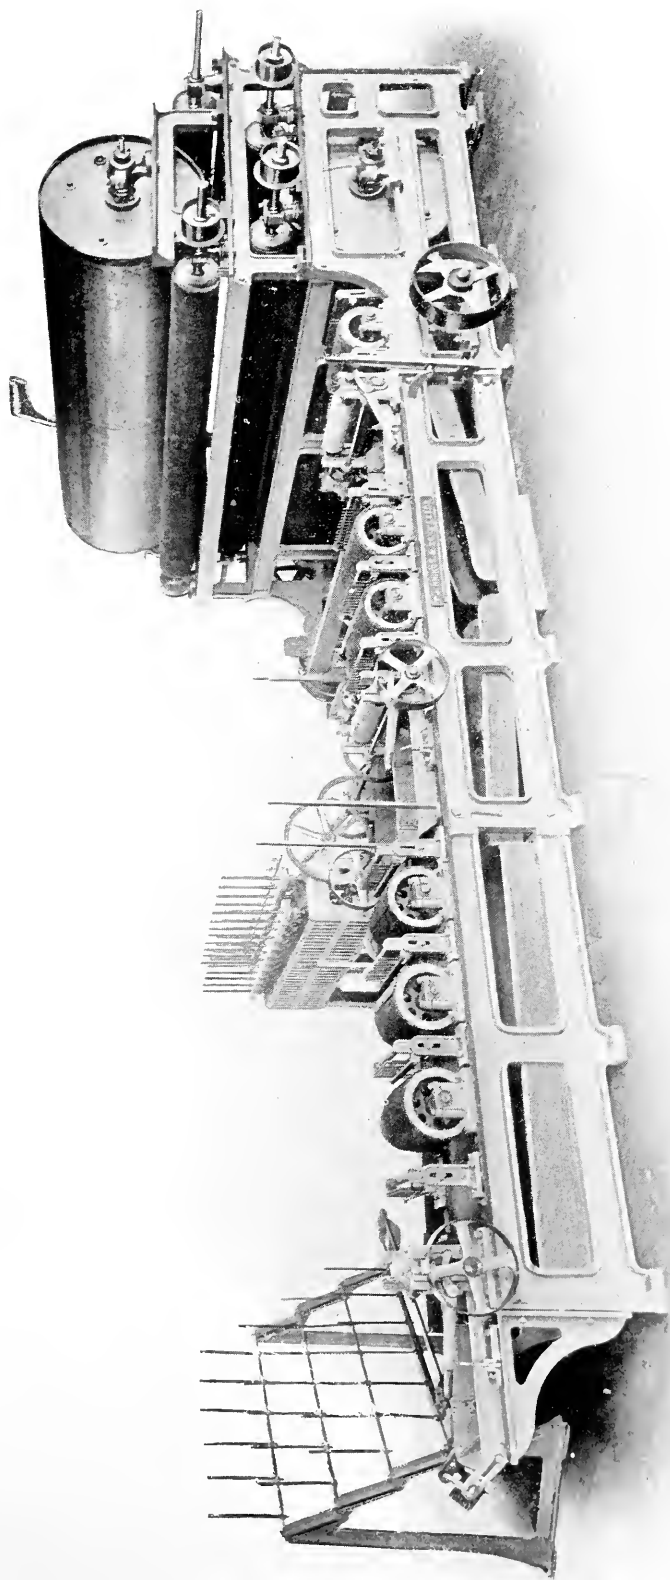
Improved large twine polishing machine. (Made by Messrs Thomas Jennings & Sons, Leeds.)
